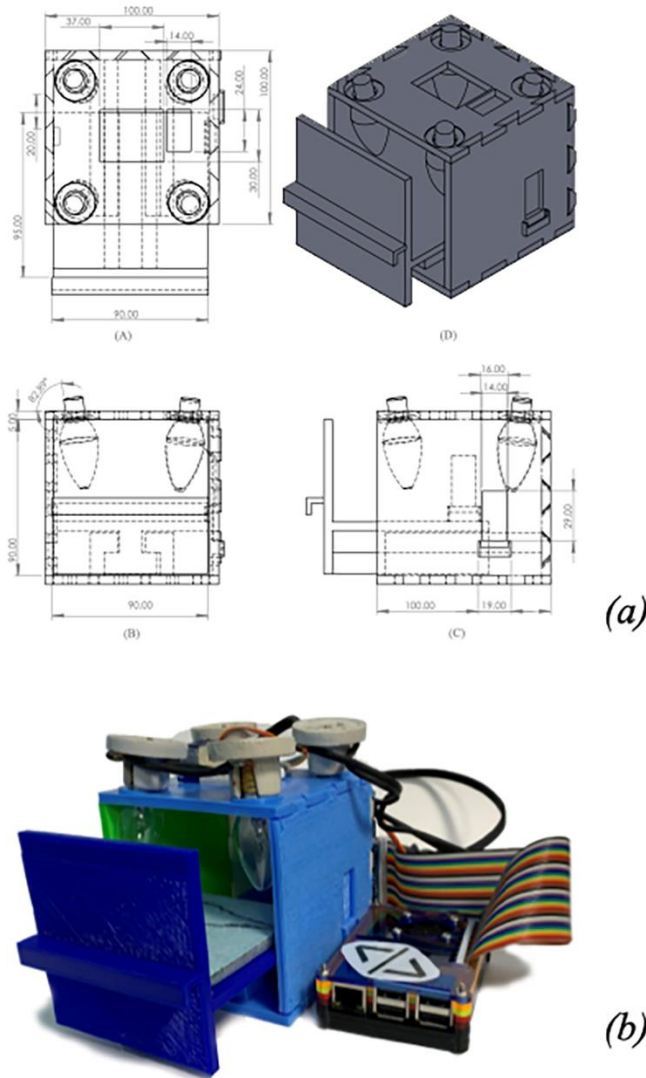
Testing bench design overview: (a) testing bench side views and isometric views and (b) part assembly.
